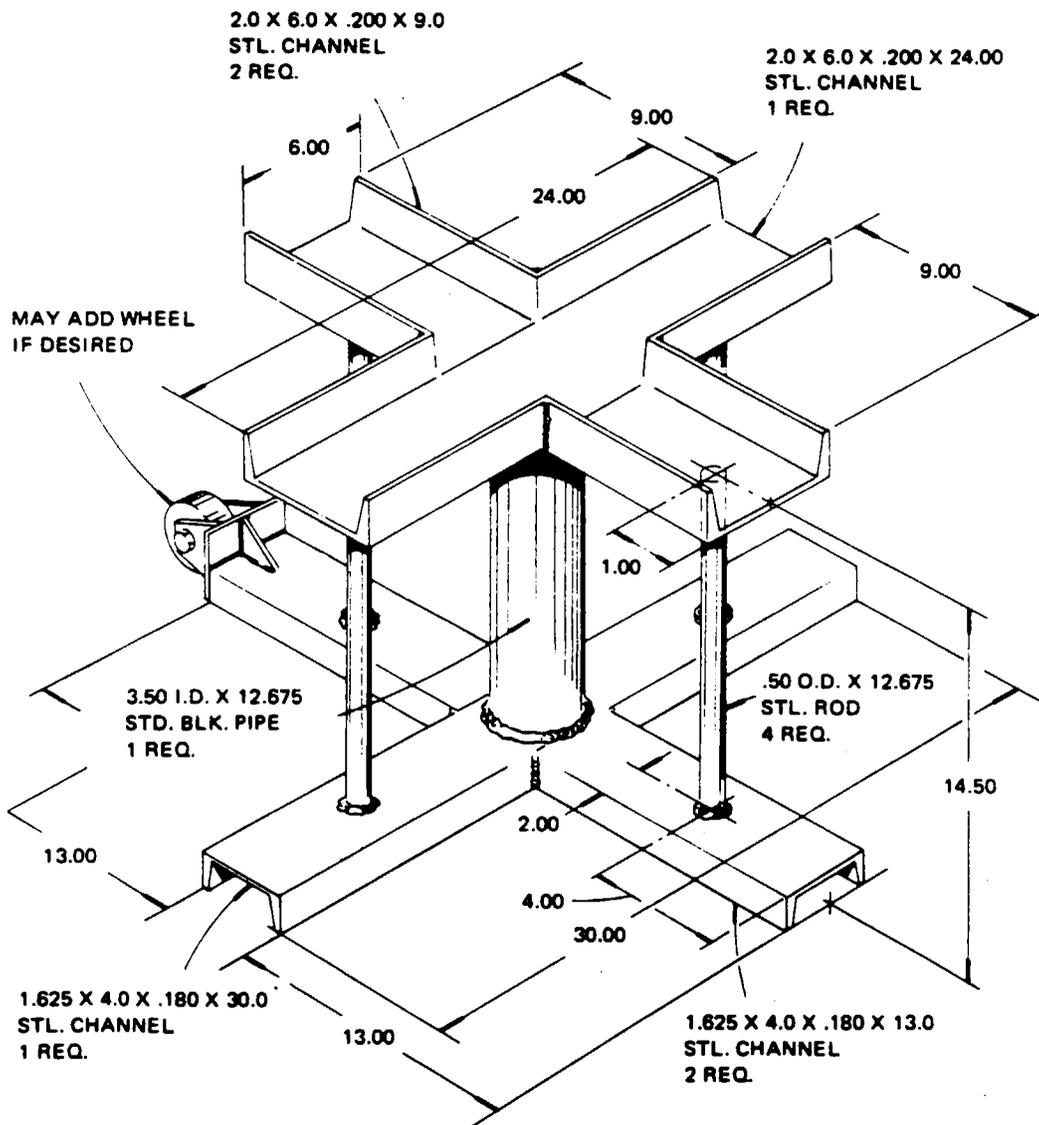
Fabricated Jack Stand for Piper Jack, Part No. 18338-00
